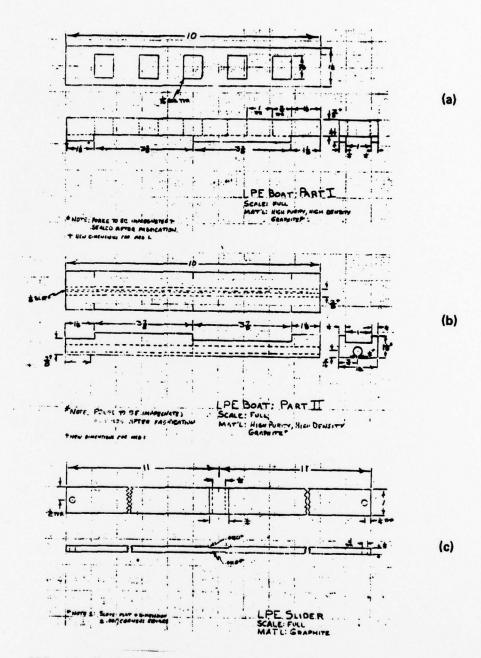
Engineering print of the LPE boat made by the Poco Graphite Co. (a) Well section. (b) Thermocouple section; note that the thermocouple well ran the length of the boat and was slotted through the bottom. (c) Slider.
